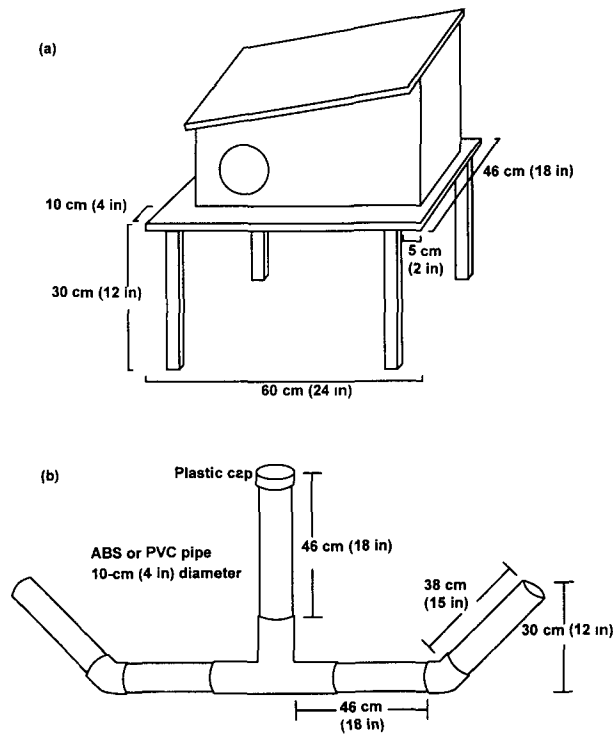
(a) Box bait station elevated on a table platform; (b) modified inverted "T" bait station.
